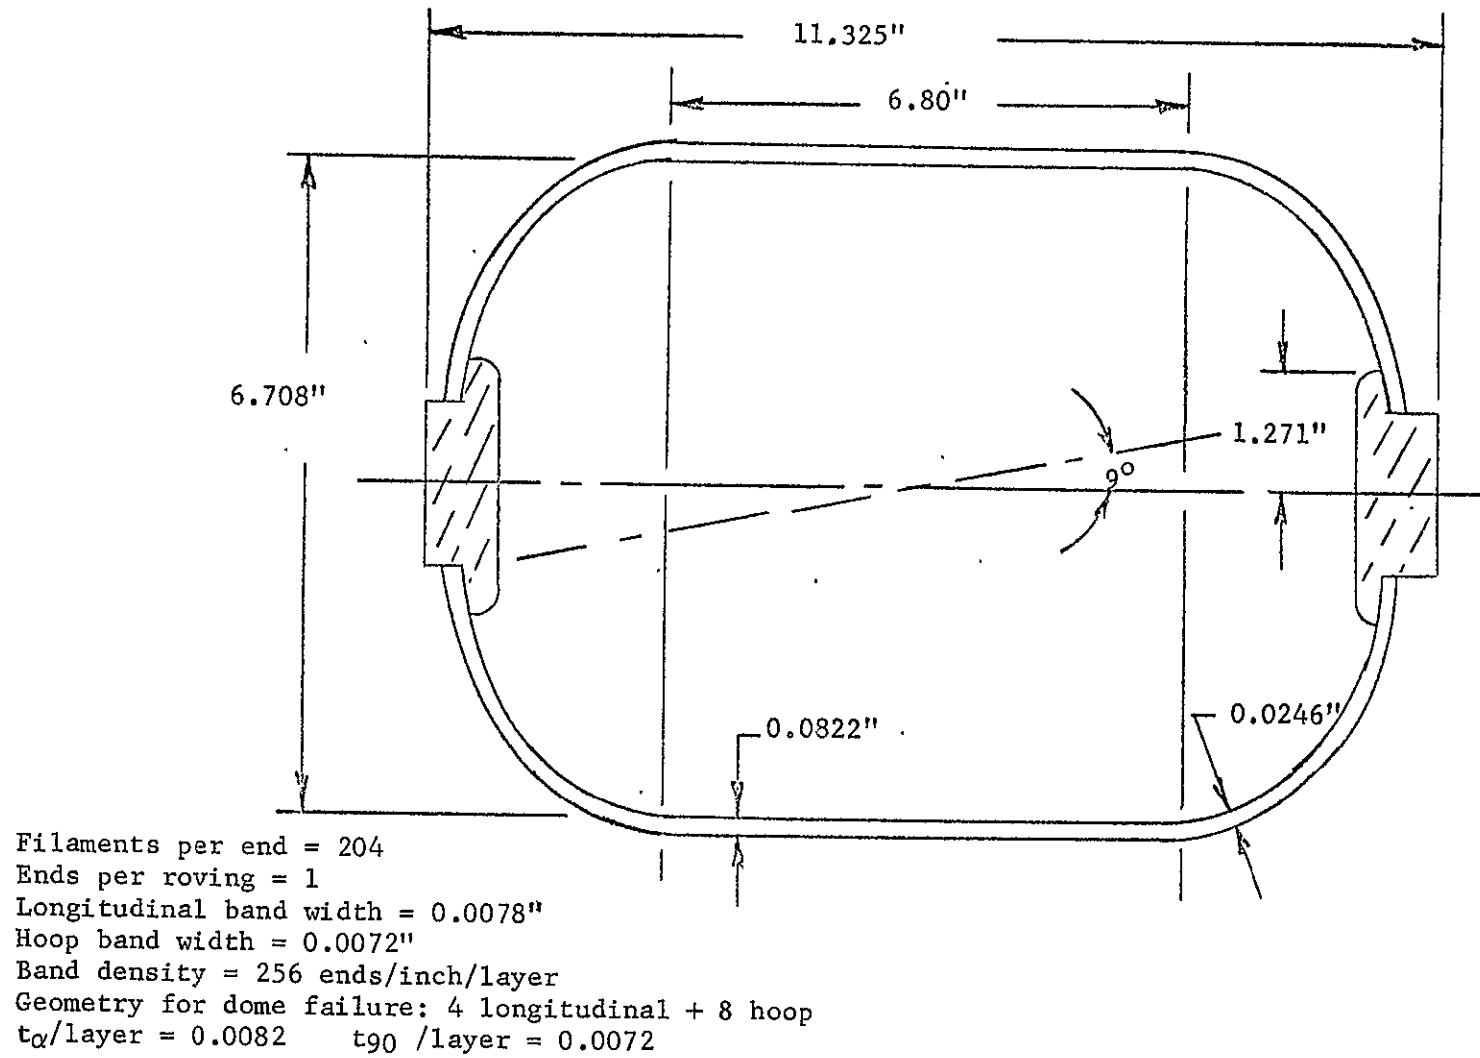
Dimensions and Winding Data for Fabrication of 6-In.-Diameter Bottles
